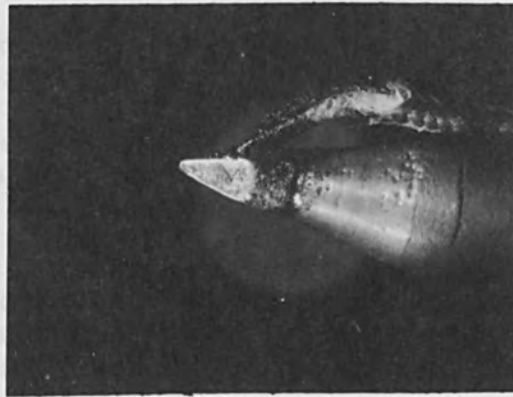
No. 20 iron-constantan thermocouple to soldering-iron tip.
